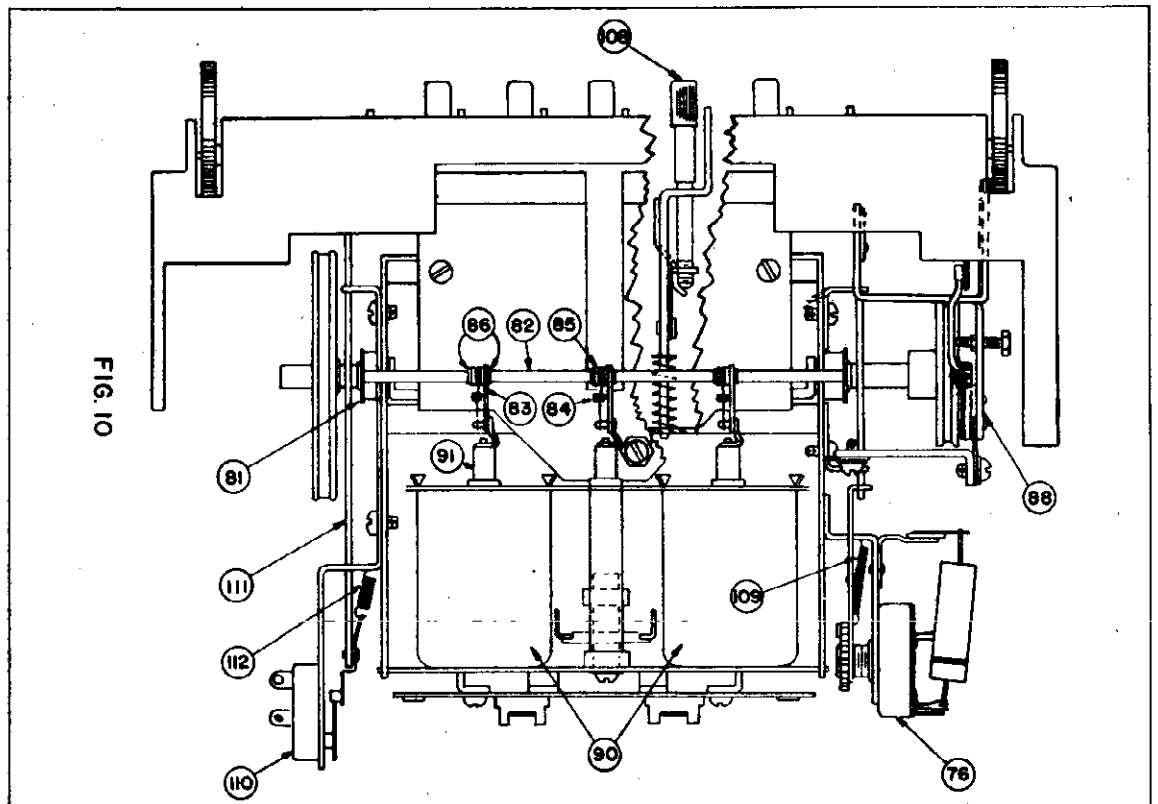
Parts Layout - Tuner Unit - Bottom View
